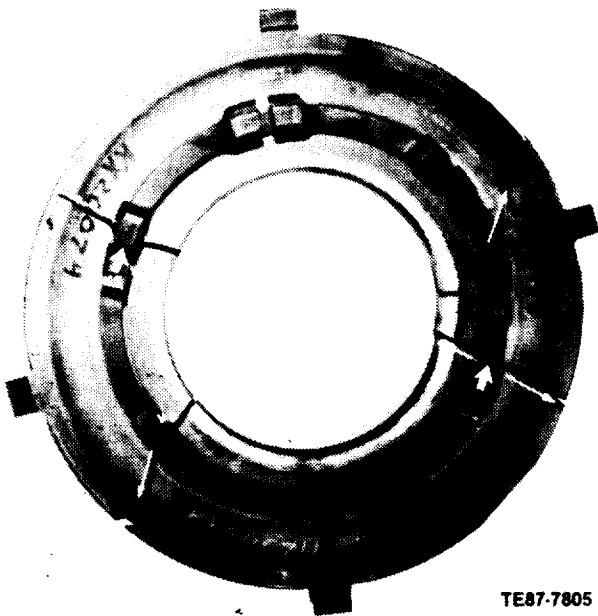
Fractured gasifier turbine scroll assembly. Black arrows point to three fracture origins at the braze joints.
